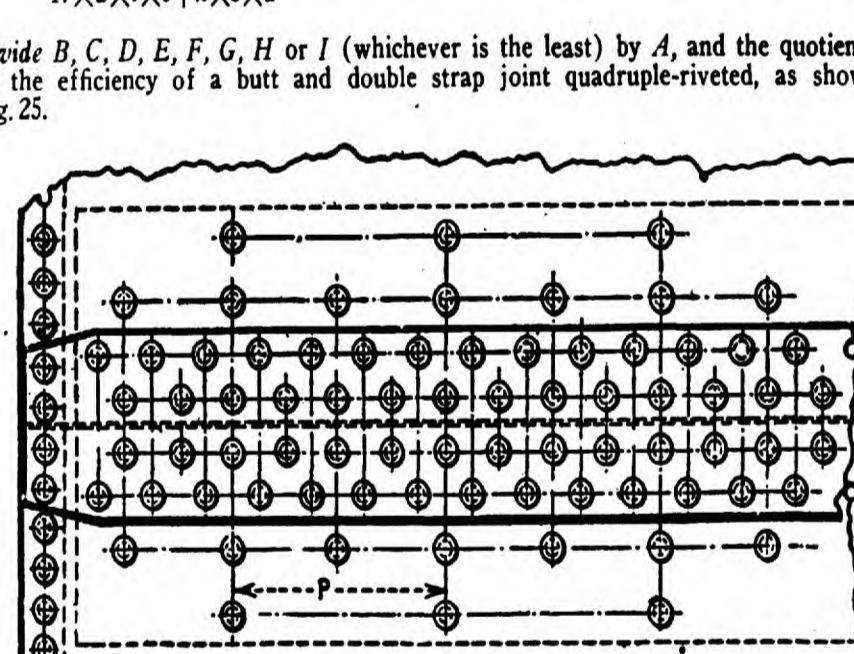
EXAMPLE OF BUTT AND DOUBLE STRAP JOINT, QUADRUPLE-RIVETED
